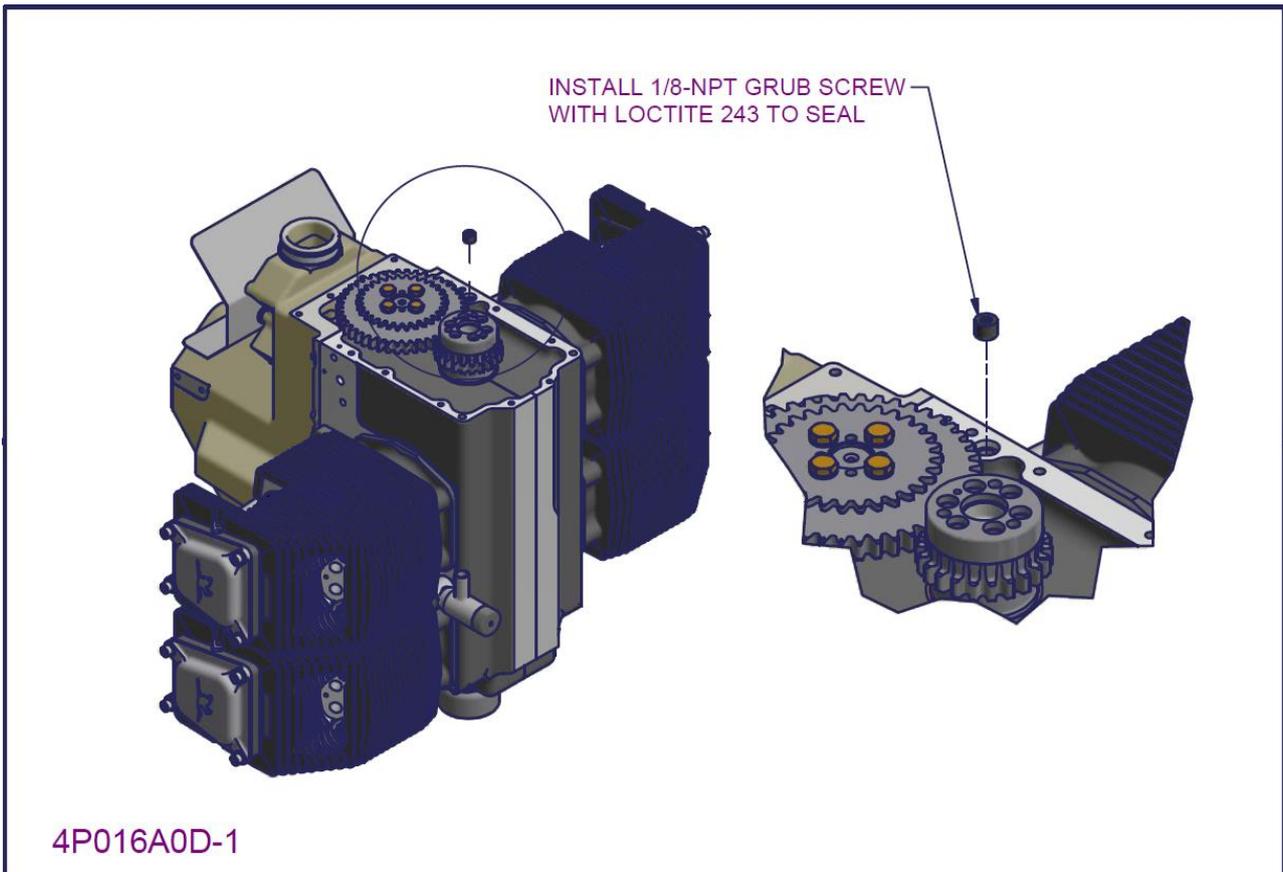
2200/3300 back plate and distributor gearbox installation 1
